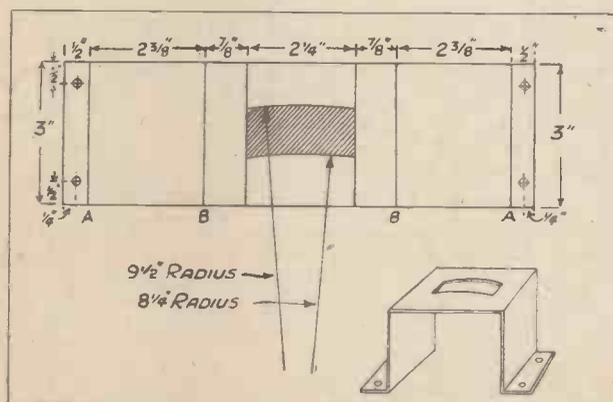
Drill out the four fixing holes and cut the shaped aperture before bending on lines A and B.
